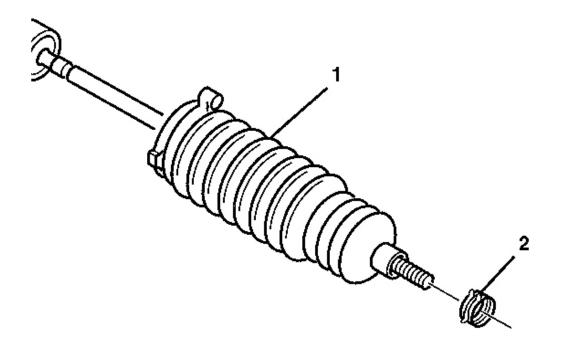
View Of Tie Rod End Clamp, Rack & Pinion Boot Courtesy of GENERAL MOTORS CORP.
